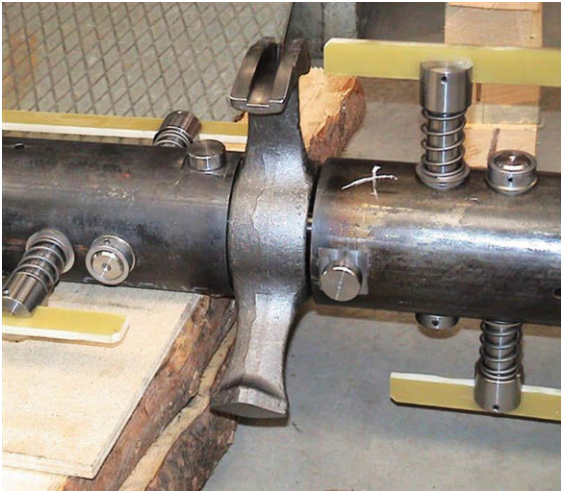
Installed spider bearing in an SSE. (Photo courtesy of BORSIG) ◀
